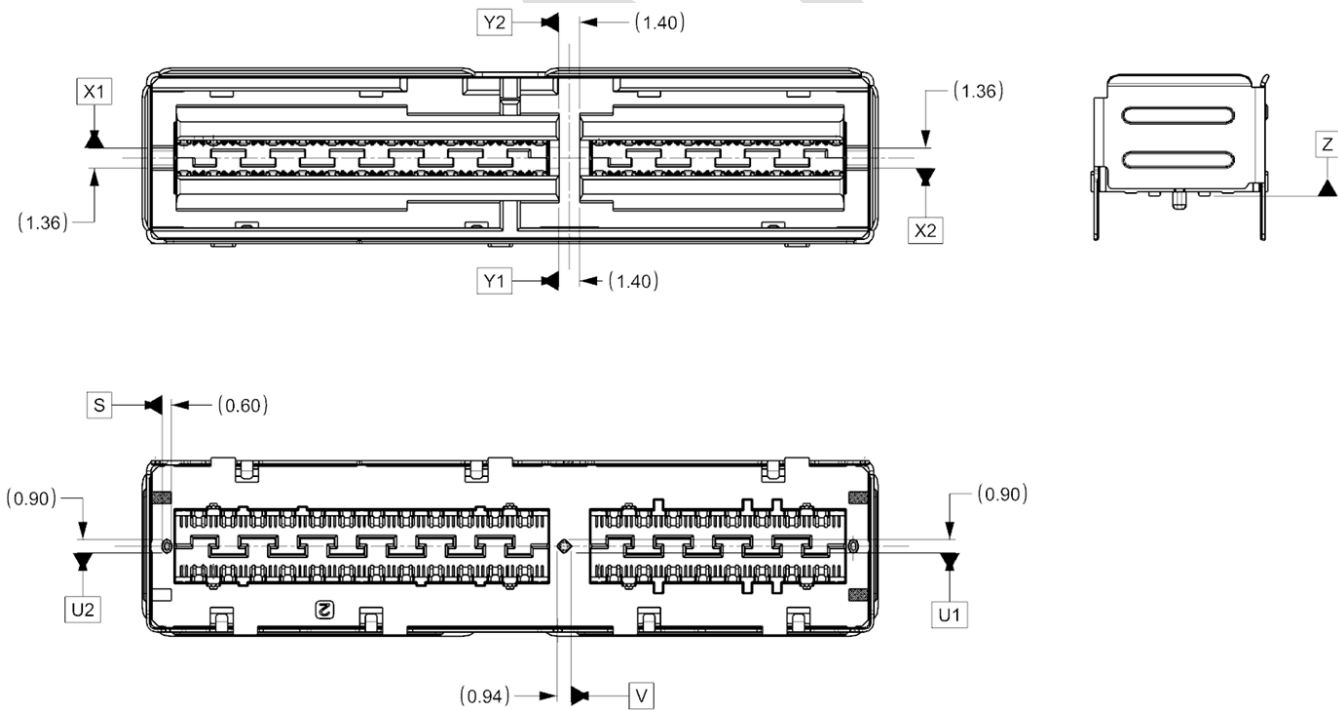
124-Pin Fixed-side Connector Datums
